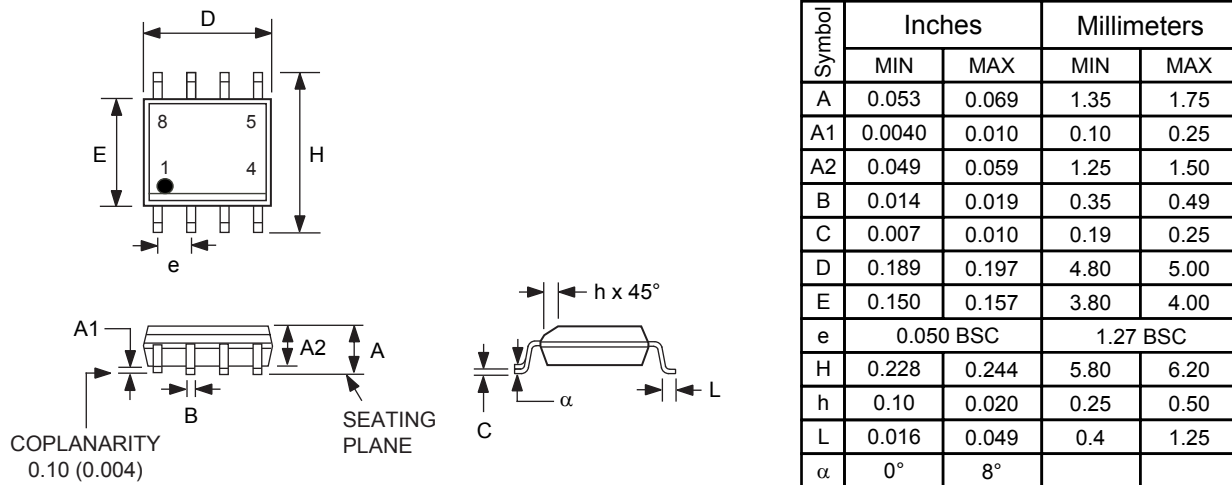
Physical dimensions, 8-lead SOIC package
